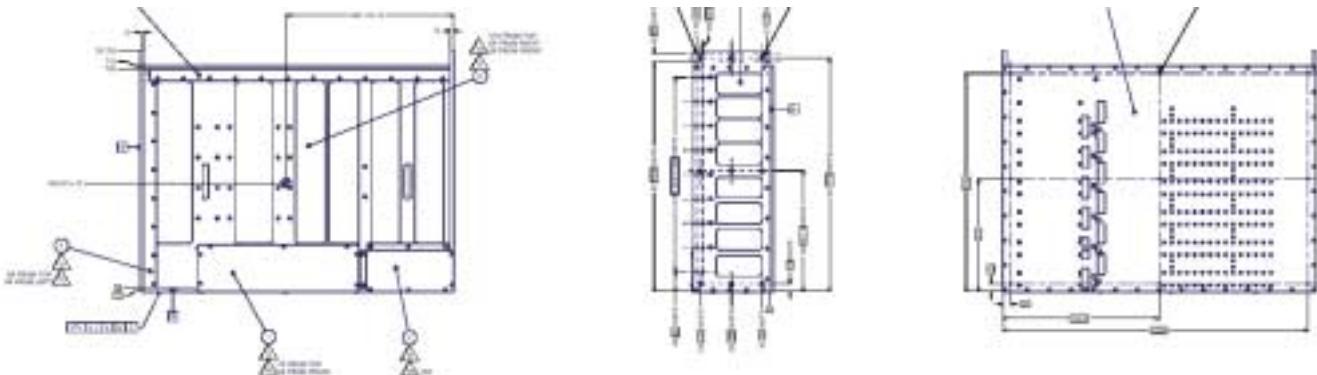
SCC handling fixture (abstract of JPL 10203041X2N drawing)
